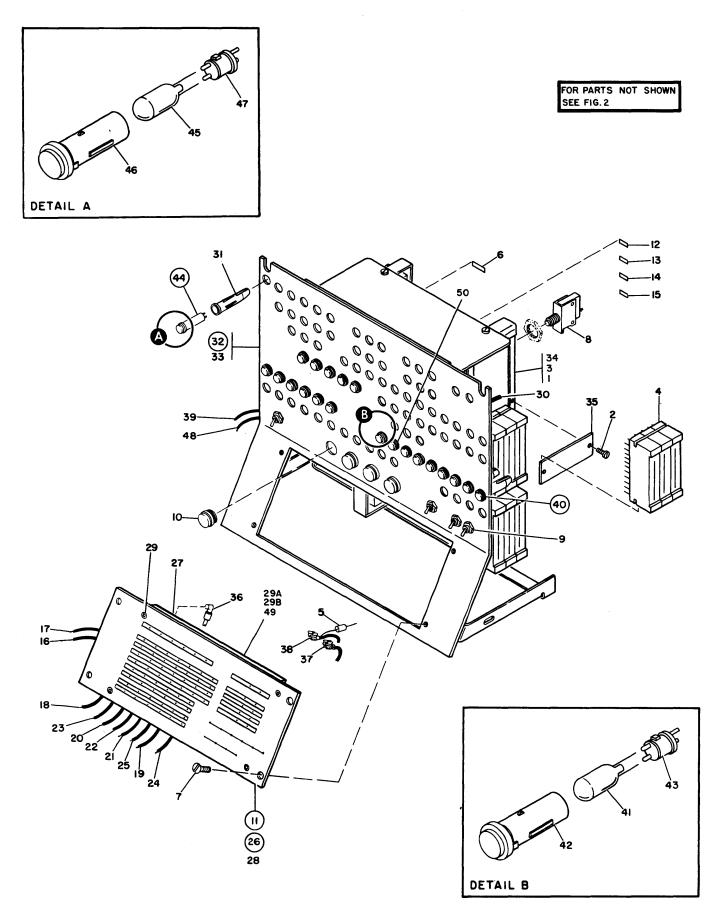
C E PANEL ASSEMBLY. SEE LIST 16.
